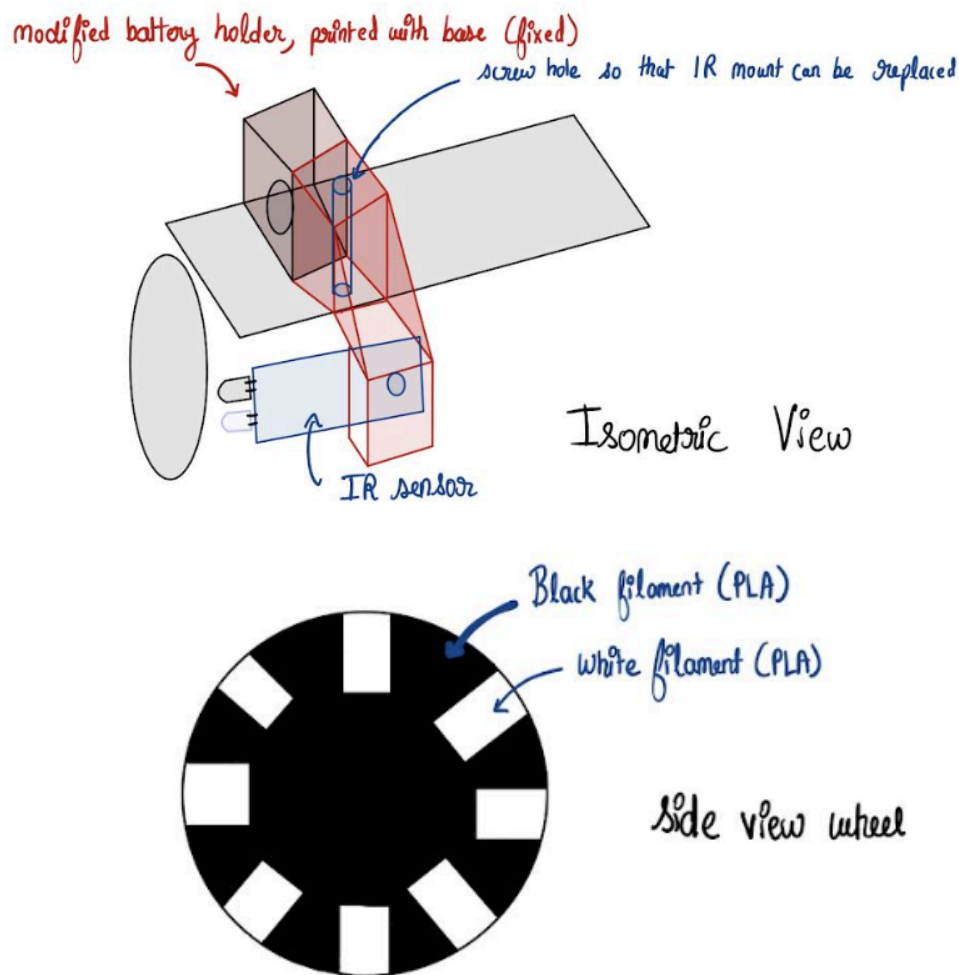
Illustration of IR sensor Mounting and sensing the wheel
